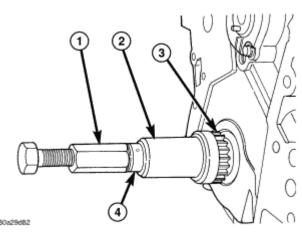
Crankshaft Sprocket Components Courtesy of CHRYSLER LLC
